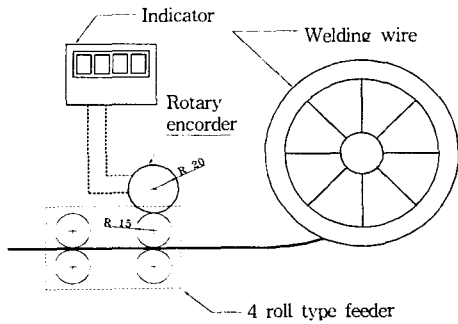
Schematic Drawing of Wire Feed Speed Measuring System
